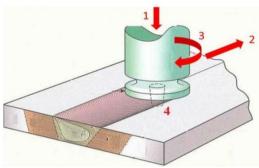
Schematic of Frequently Occurring Defect Locations in Welding Using the Friction Welding Method
